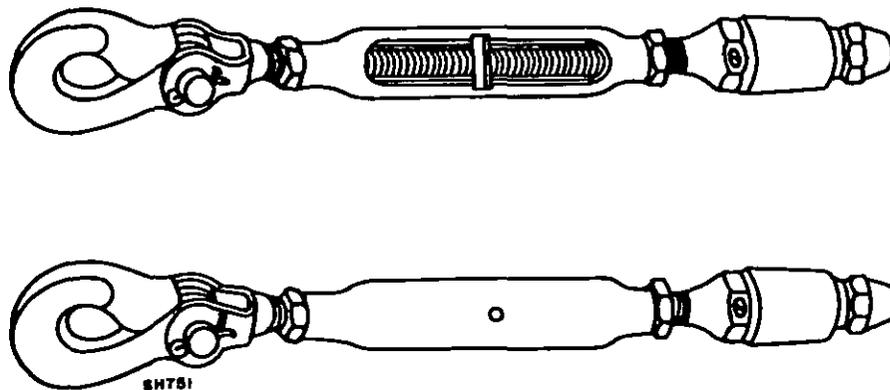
Type III, class B, turnbuckle assembly, wire rope socket end pull and sister hook-equipped end pull.
